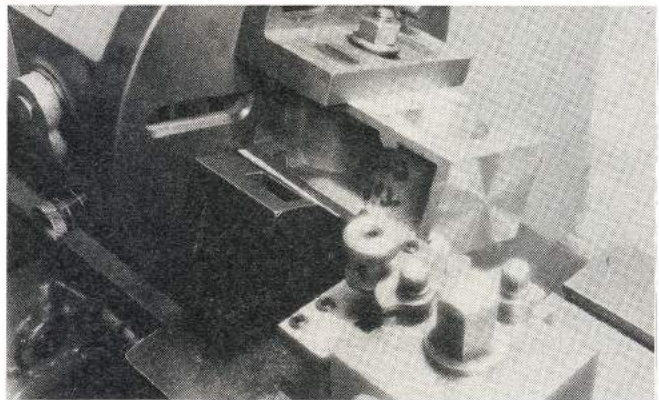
Gripping the cylinder block between two angle plates to machine the end face.
